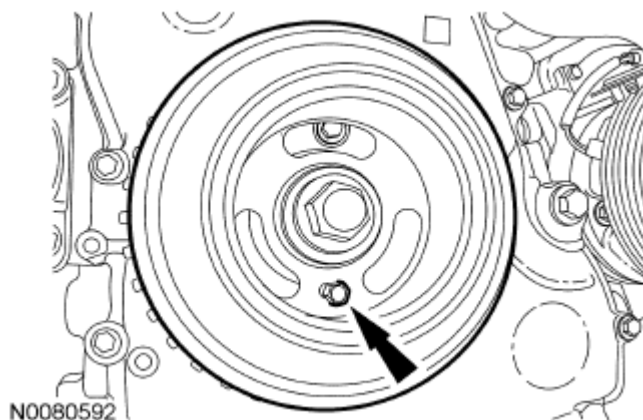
Locating Crankshaft Pulley Hole Bolt (6 mm x 18 mm)
